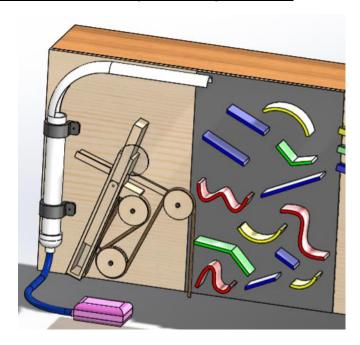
CAD drawing for preschooler section, including a pulley linkage system, a stomp rocket, and a magnetic board.
